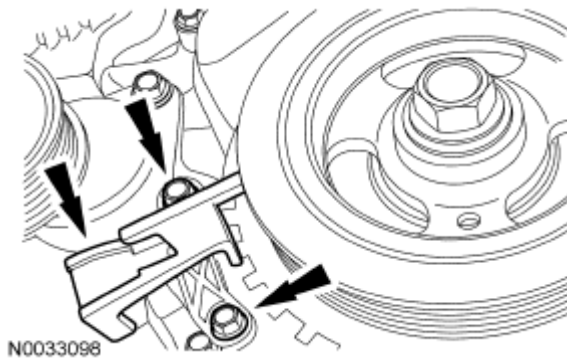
Locating CKP Sensor Bolts (2 Of 2)
